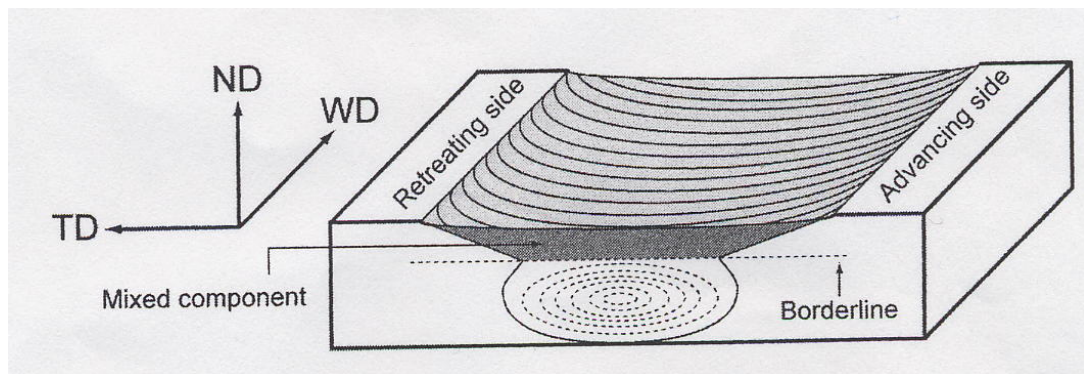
Three-dimensional drawing of the onion rings in the nugget zone [104].
